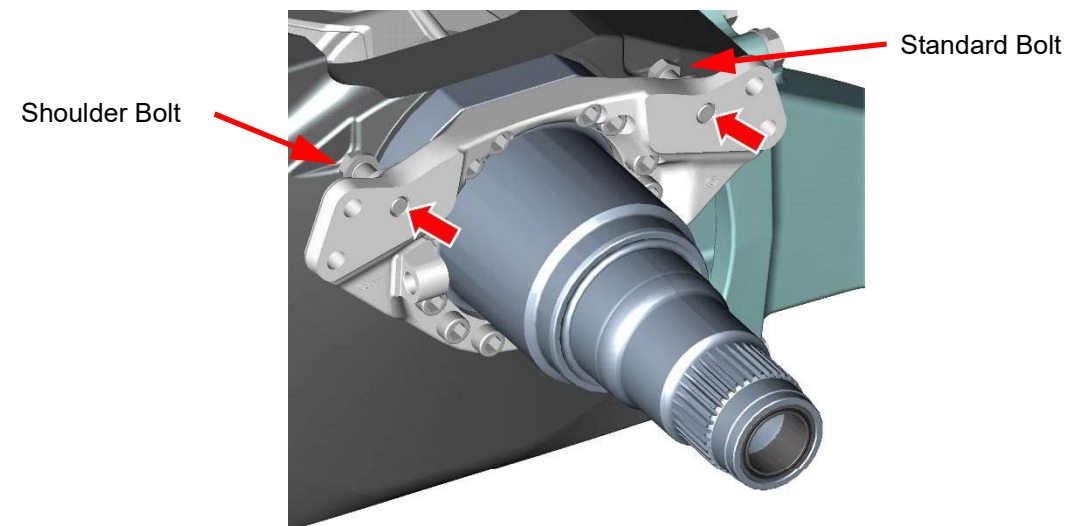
Locating Shoulder Bolt and Standard Bolt Positions
